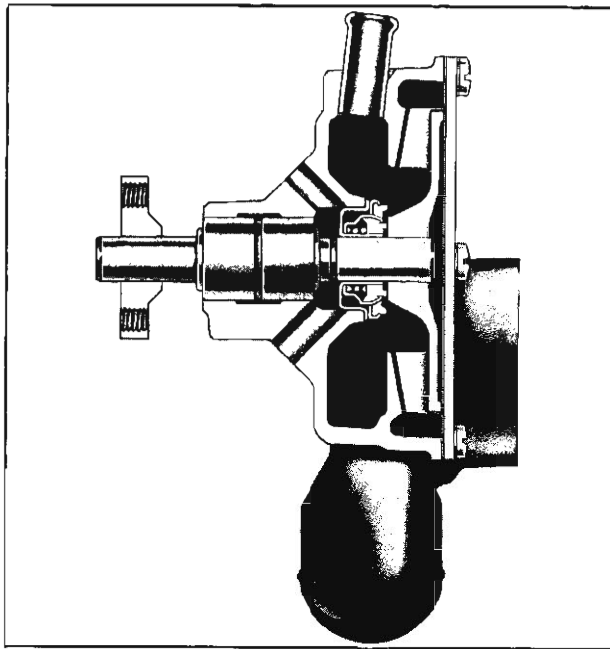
Water Pump, 348 Cu. In., 8 Cylinder
